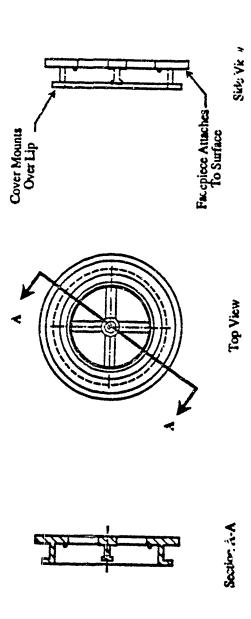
CONVOLUTED CHECK VALVE SEAT WITH POST ATTACHMENT
